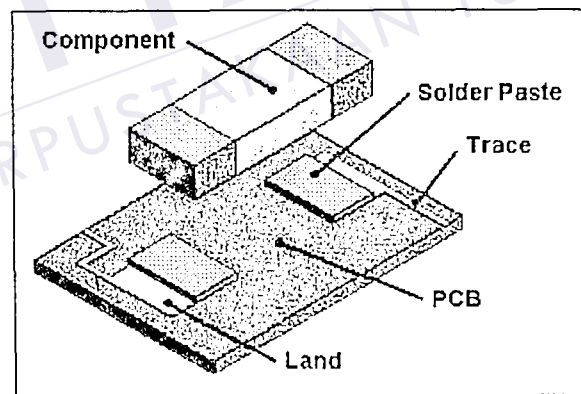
Main components of a typical SMT electronic assembly.
